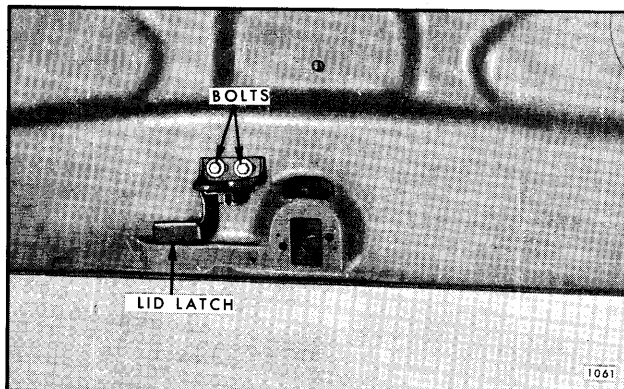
Engine Compartment Lid Latch Assembly - "Z" Styles
